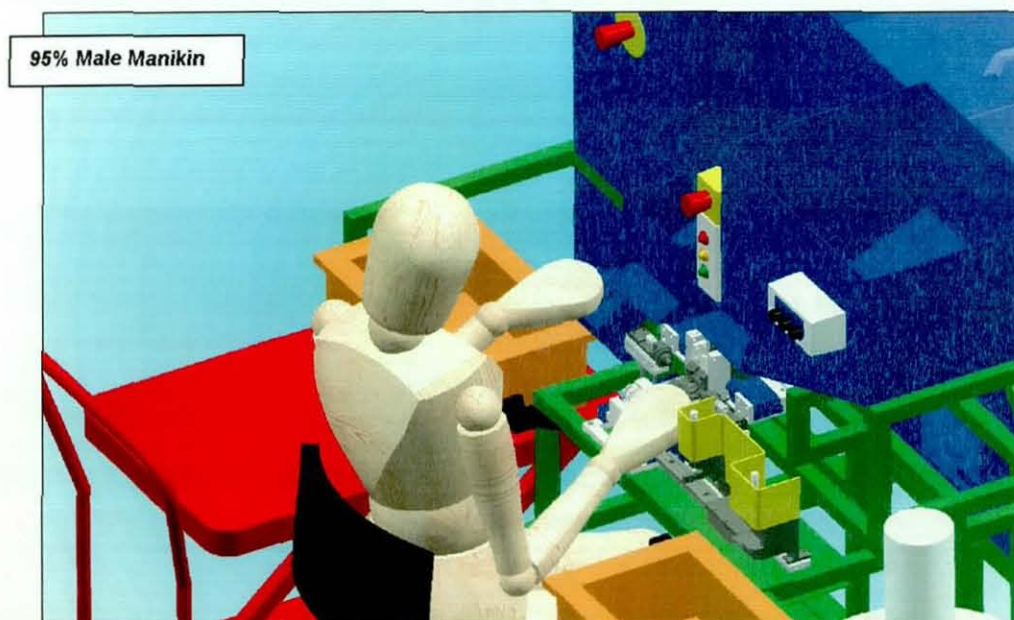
Full 3D model of new assembly machine with 95% percentile man
